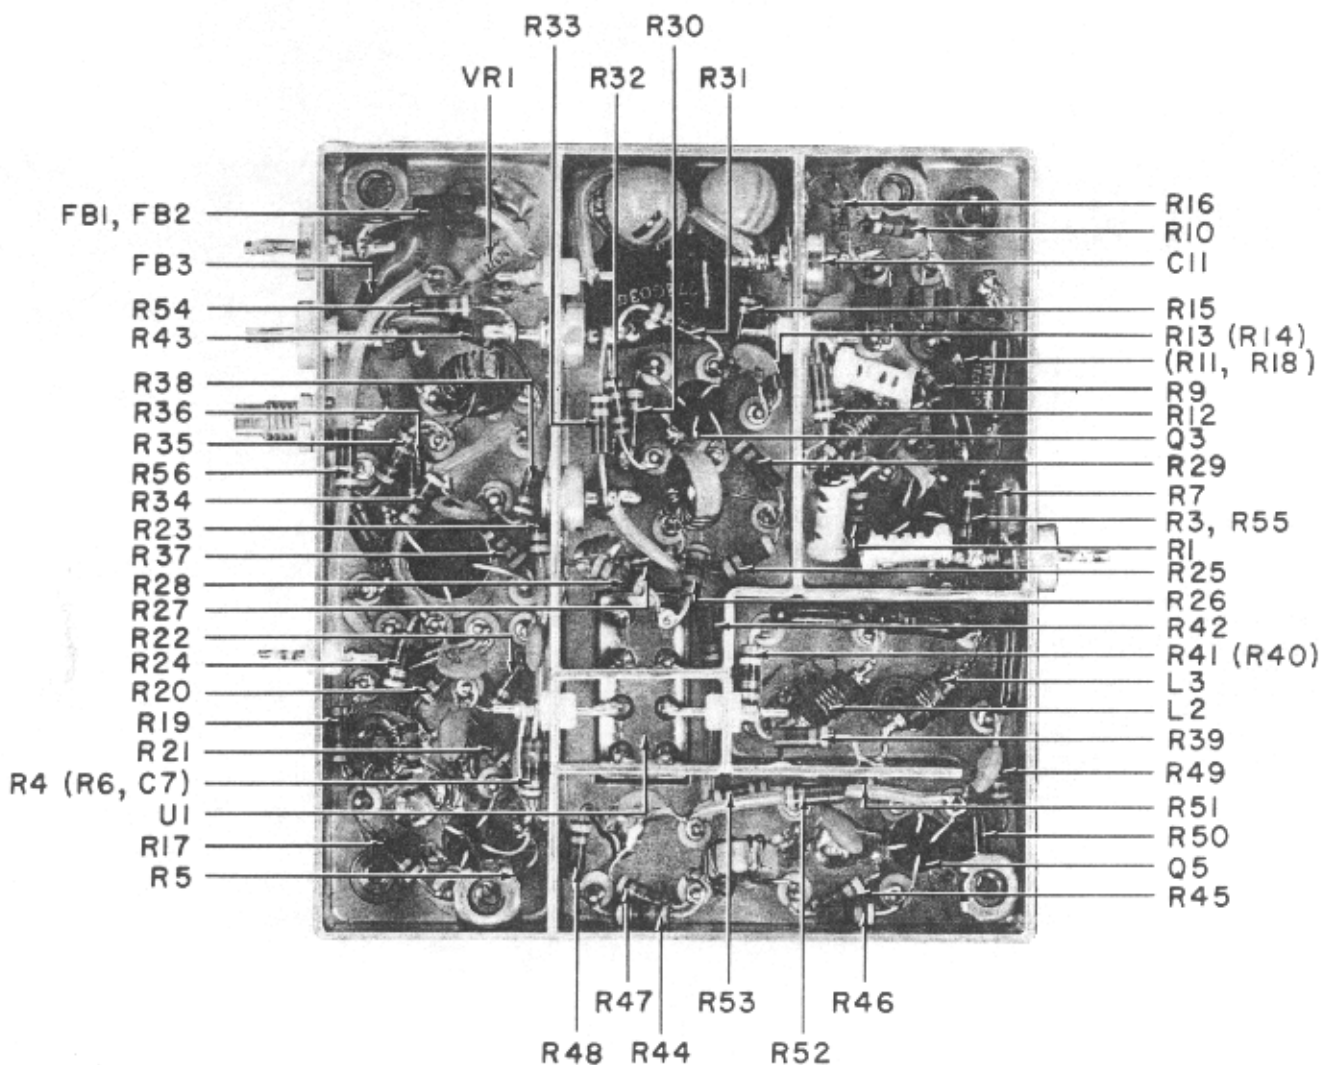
Part 17414 VCO Assembly (A15A1), Location of Components
